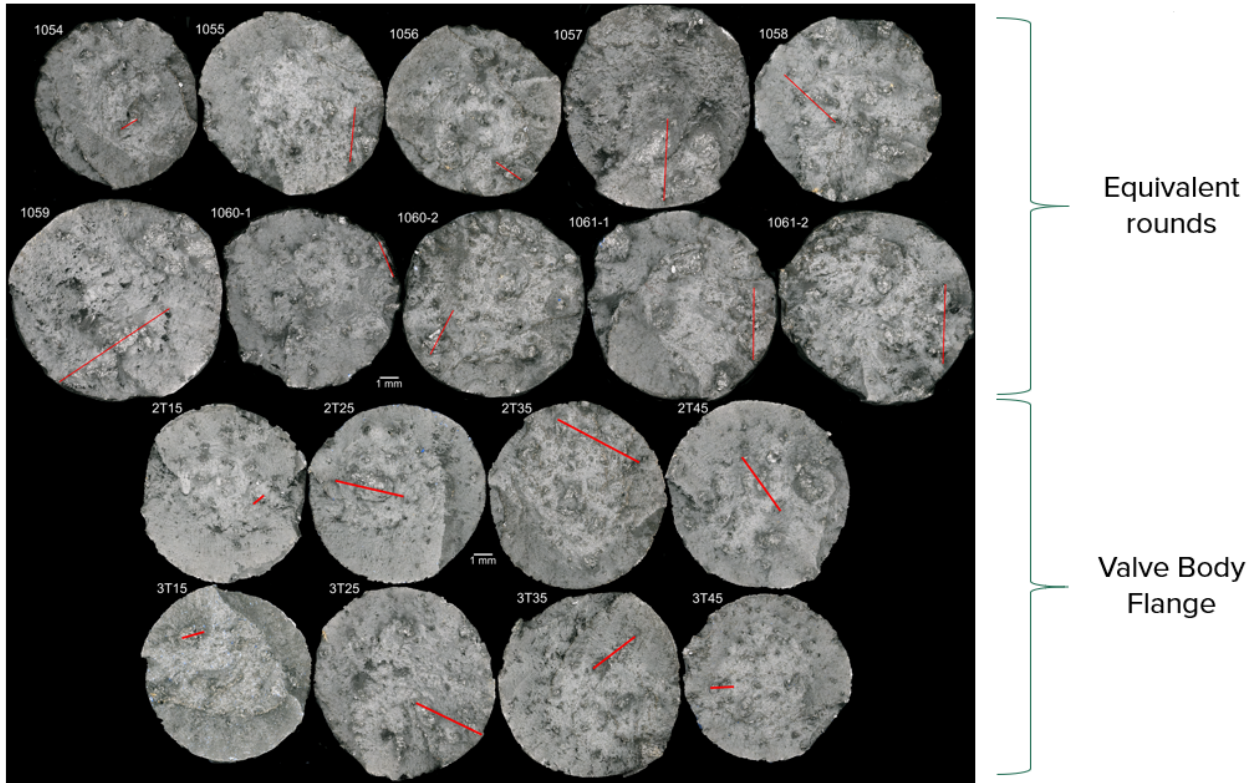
shows the fracture surfaces of .5" tensile bars from the valve body and the keel block. The pore cluster is marked in red.
